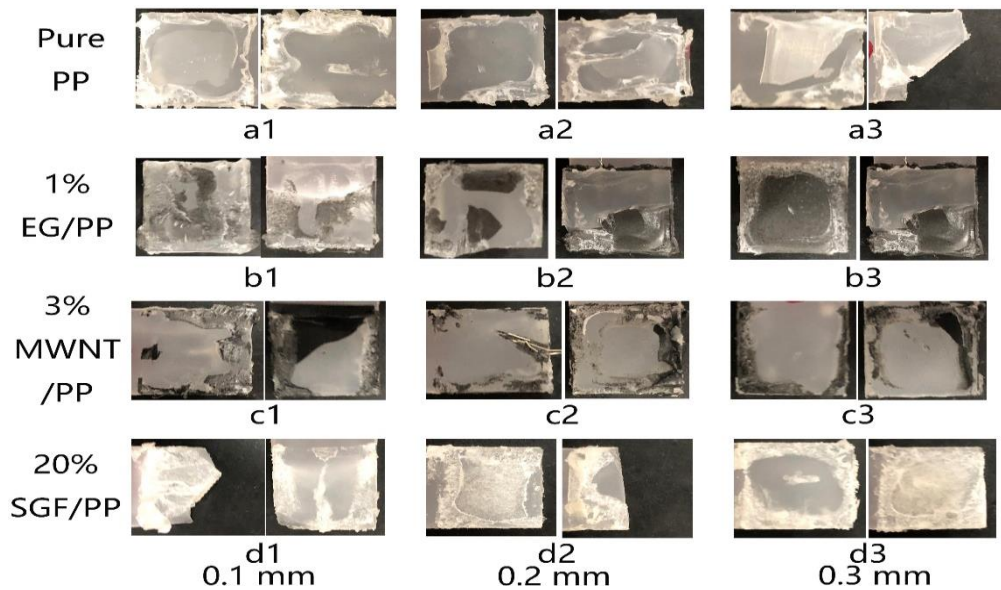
Fracture surface of the joints with different flat energy director of the lap shear test. a1-a3 for the joints welded with pure PP FED; b1-b2 for the joints welded with 1% EG/PP FED; c1-c2 for the joints welded with 3% MWNT/PP FED; d1-d2 for the joints welded with 20% SGF/PP
